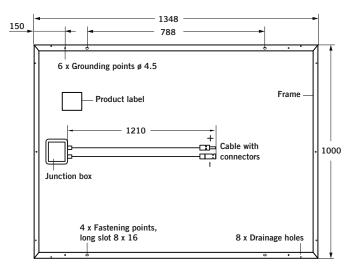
External dimensions (in mm) and components for Q.PEAK S-G3
